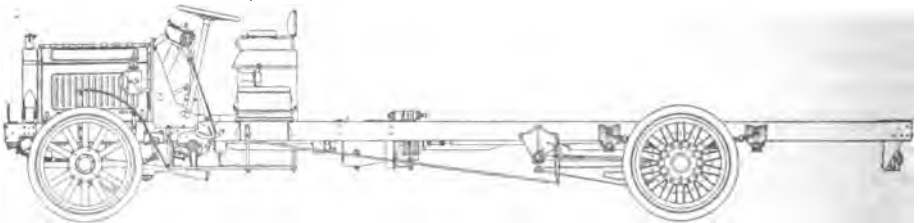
Side view of a modern Packard chainless truck. Drive; worm; power; four cylinder gasoline engine; clutch; disk; transmission; four speed selective sliding; "live" rear axle; full floating.
